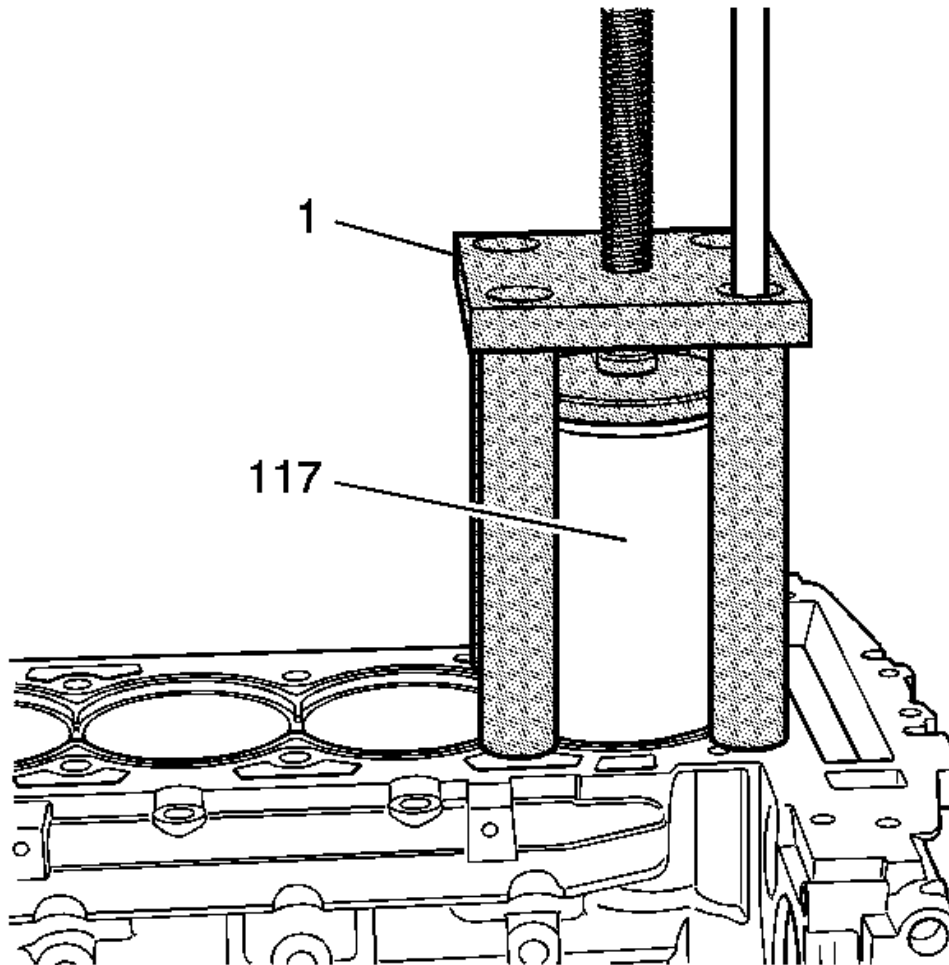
Installing Cylinder Bore Sleeve Puller Attachment Bolts
